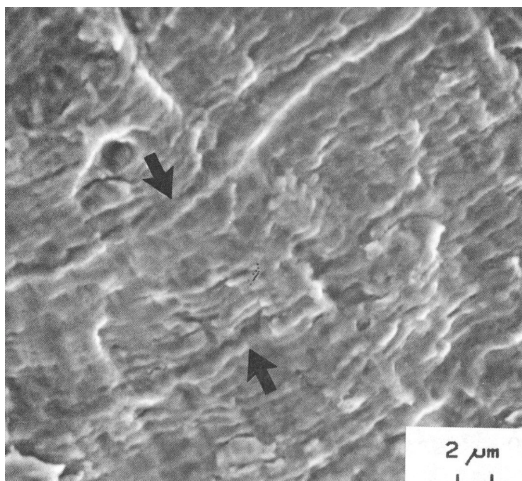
Fracture morphology of bolt hole cracks [1], [2]
